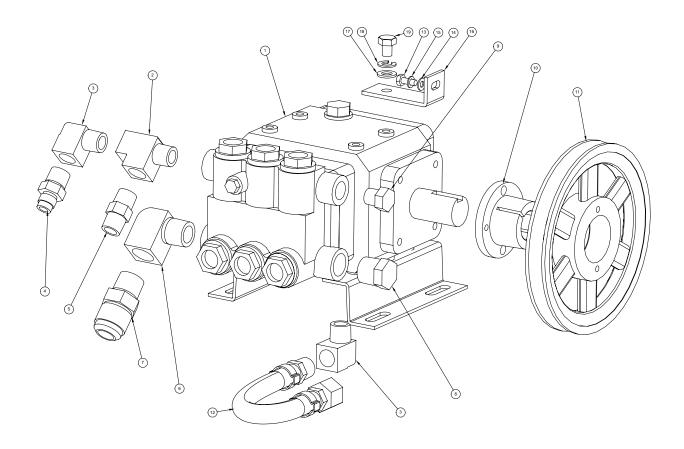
Pump & Blower Assembly D-4050 Rev B
